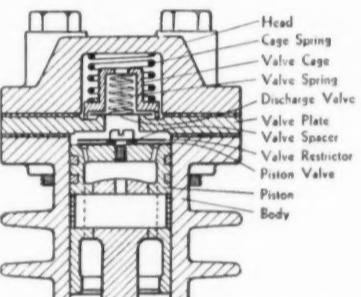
This drawing shows the details of the piston and discharge valve assemblies.
